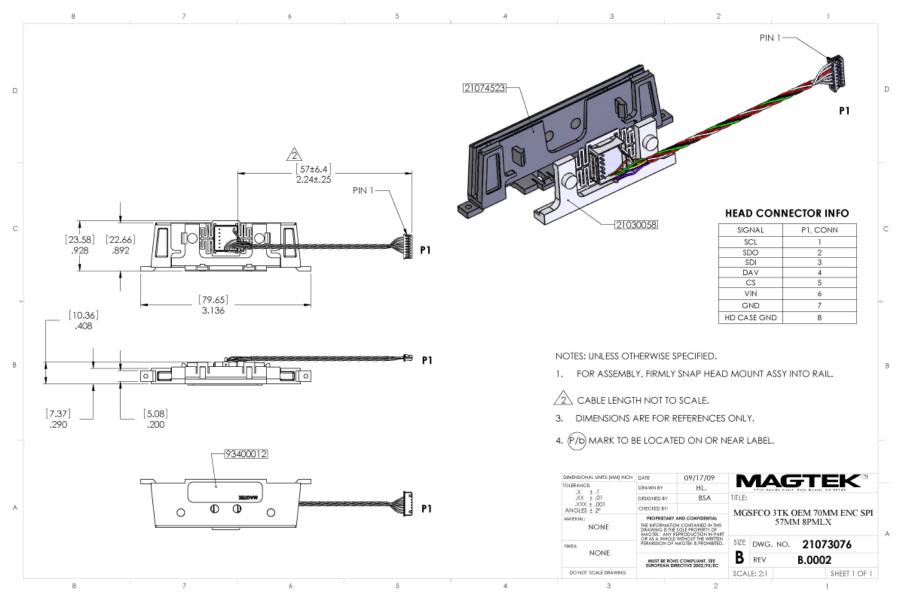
Encrypting SPI 70mm MagnePrint rail with 57mm cable & 8-pin connector
